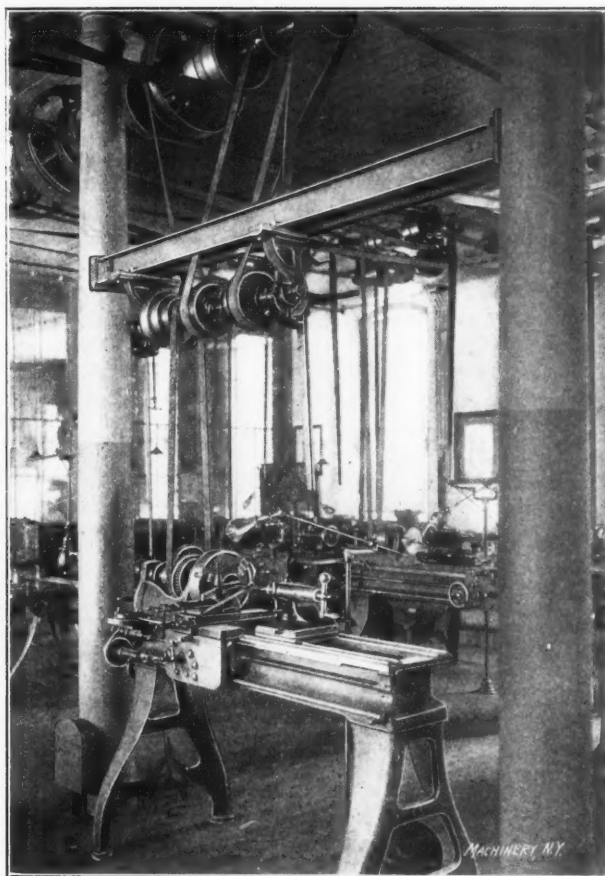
Engine Lathe beneath Lineshaft and driven by Short Belt from Countershaft.
